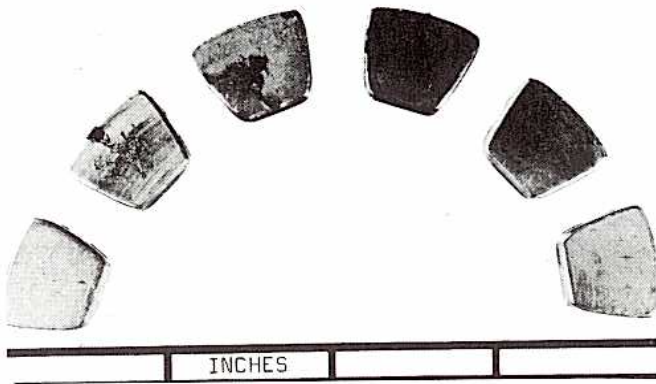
Overload on small steam turbo-generator thrust bearing due to water passing through the turbine.
